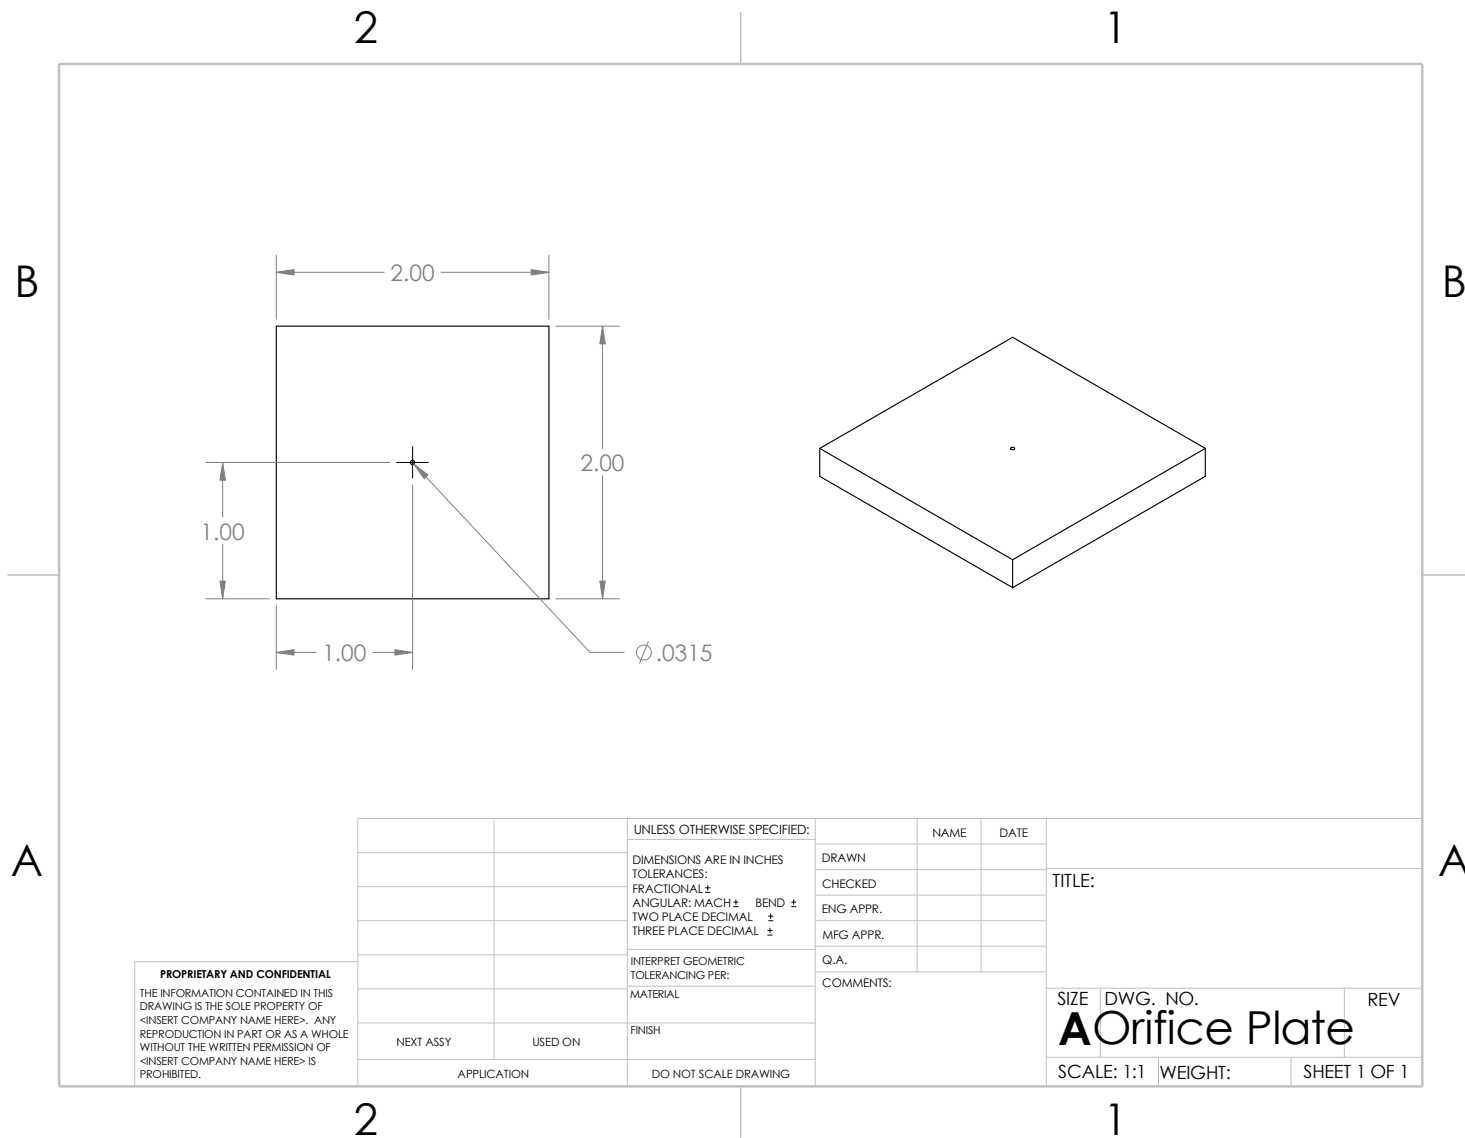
Engineering drawing of the orifice plate, through which gas was injected into the fluid chamber.
